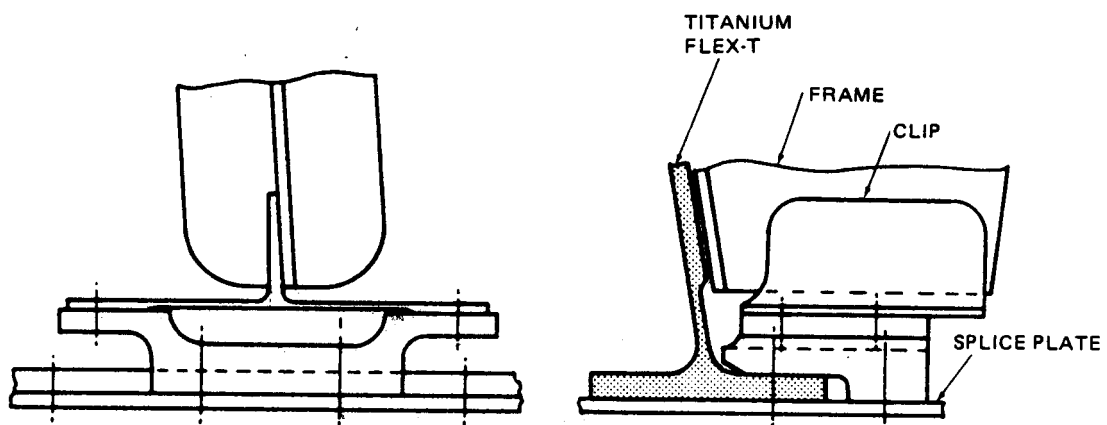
DETAIL OF FUSELAGE-TO-WING INTERSECTION
